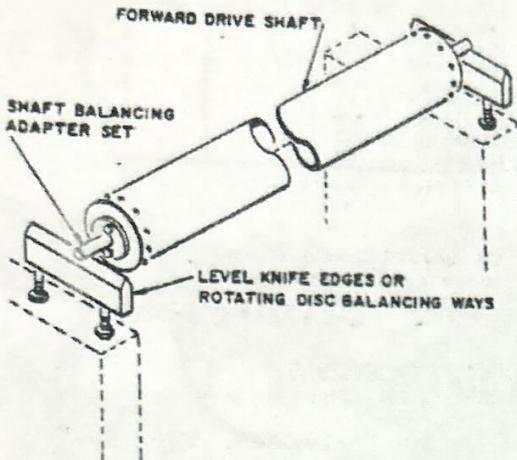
A. Checking Static Balance of Forward Drive Shaft
